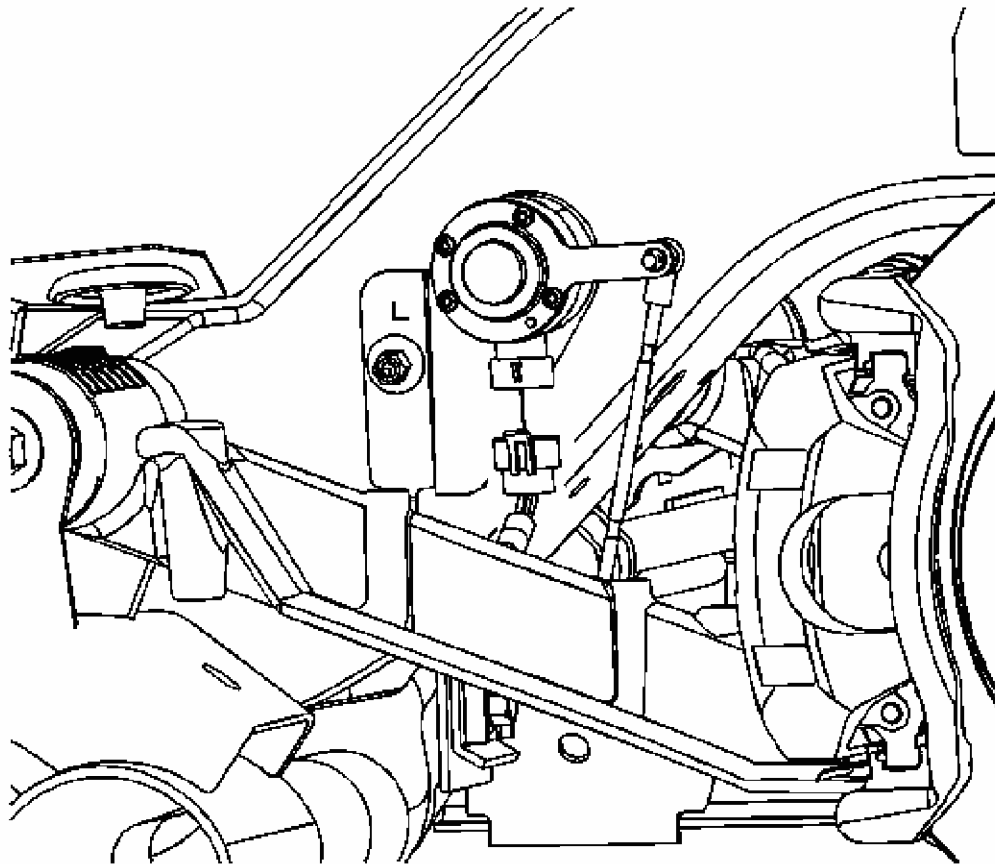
Identifying Rear Position Link, Sensor & Connector
